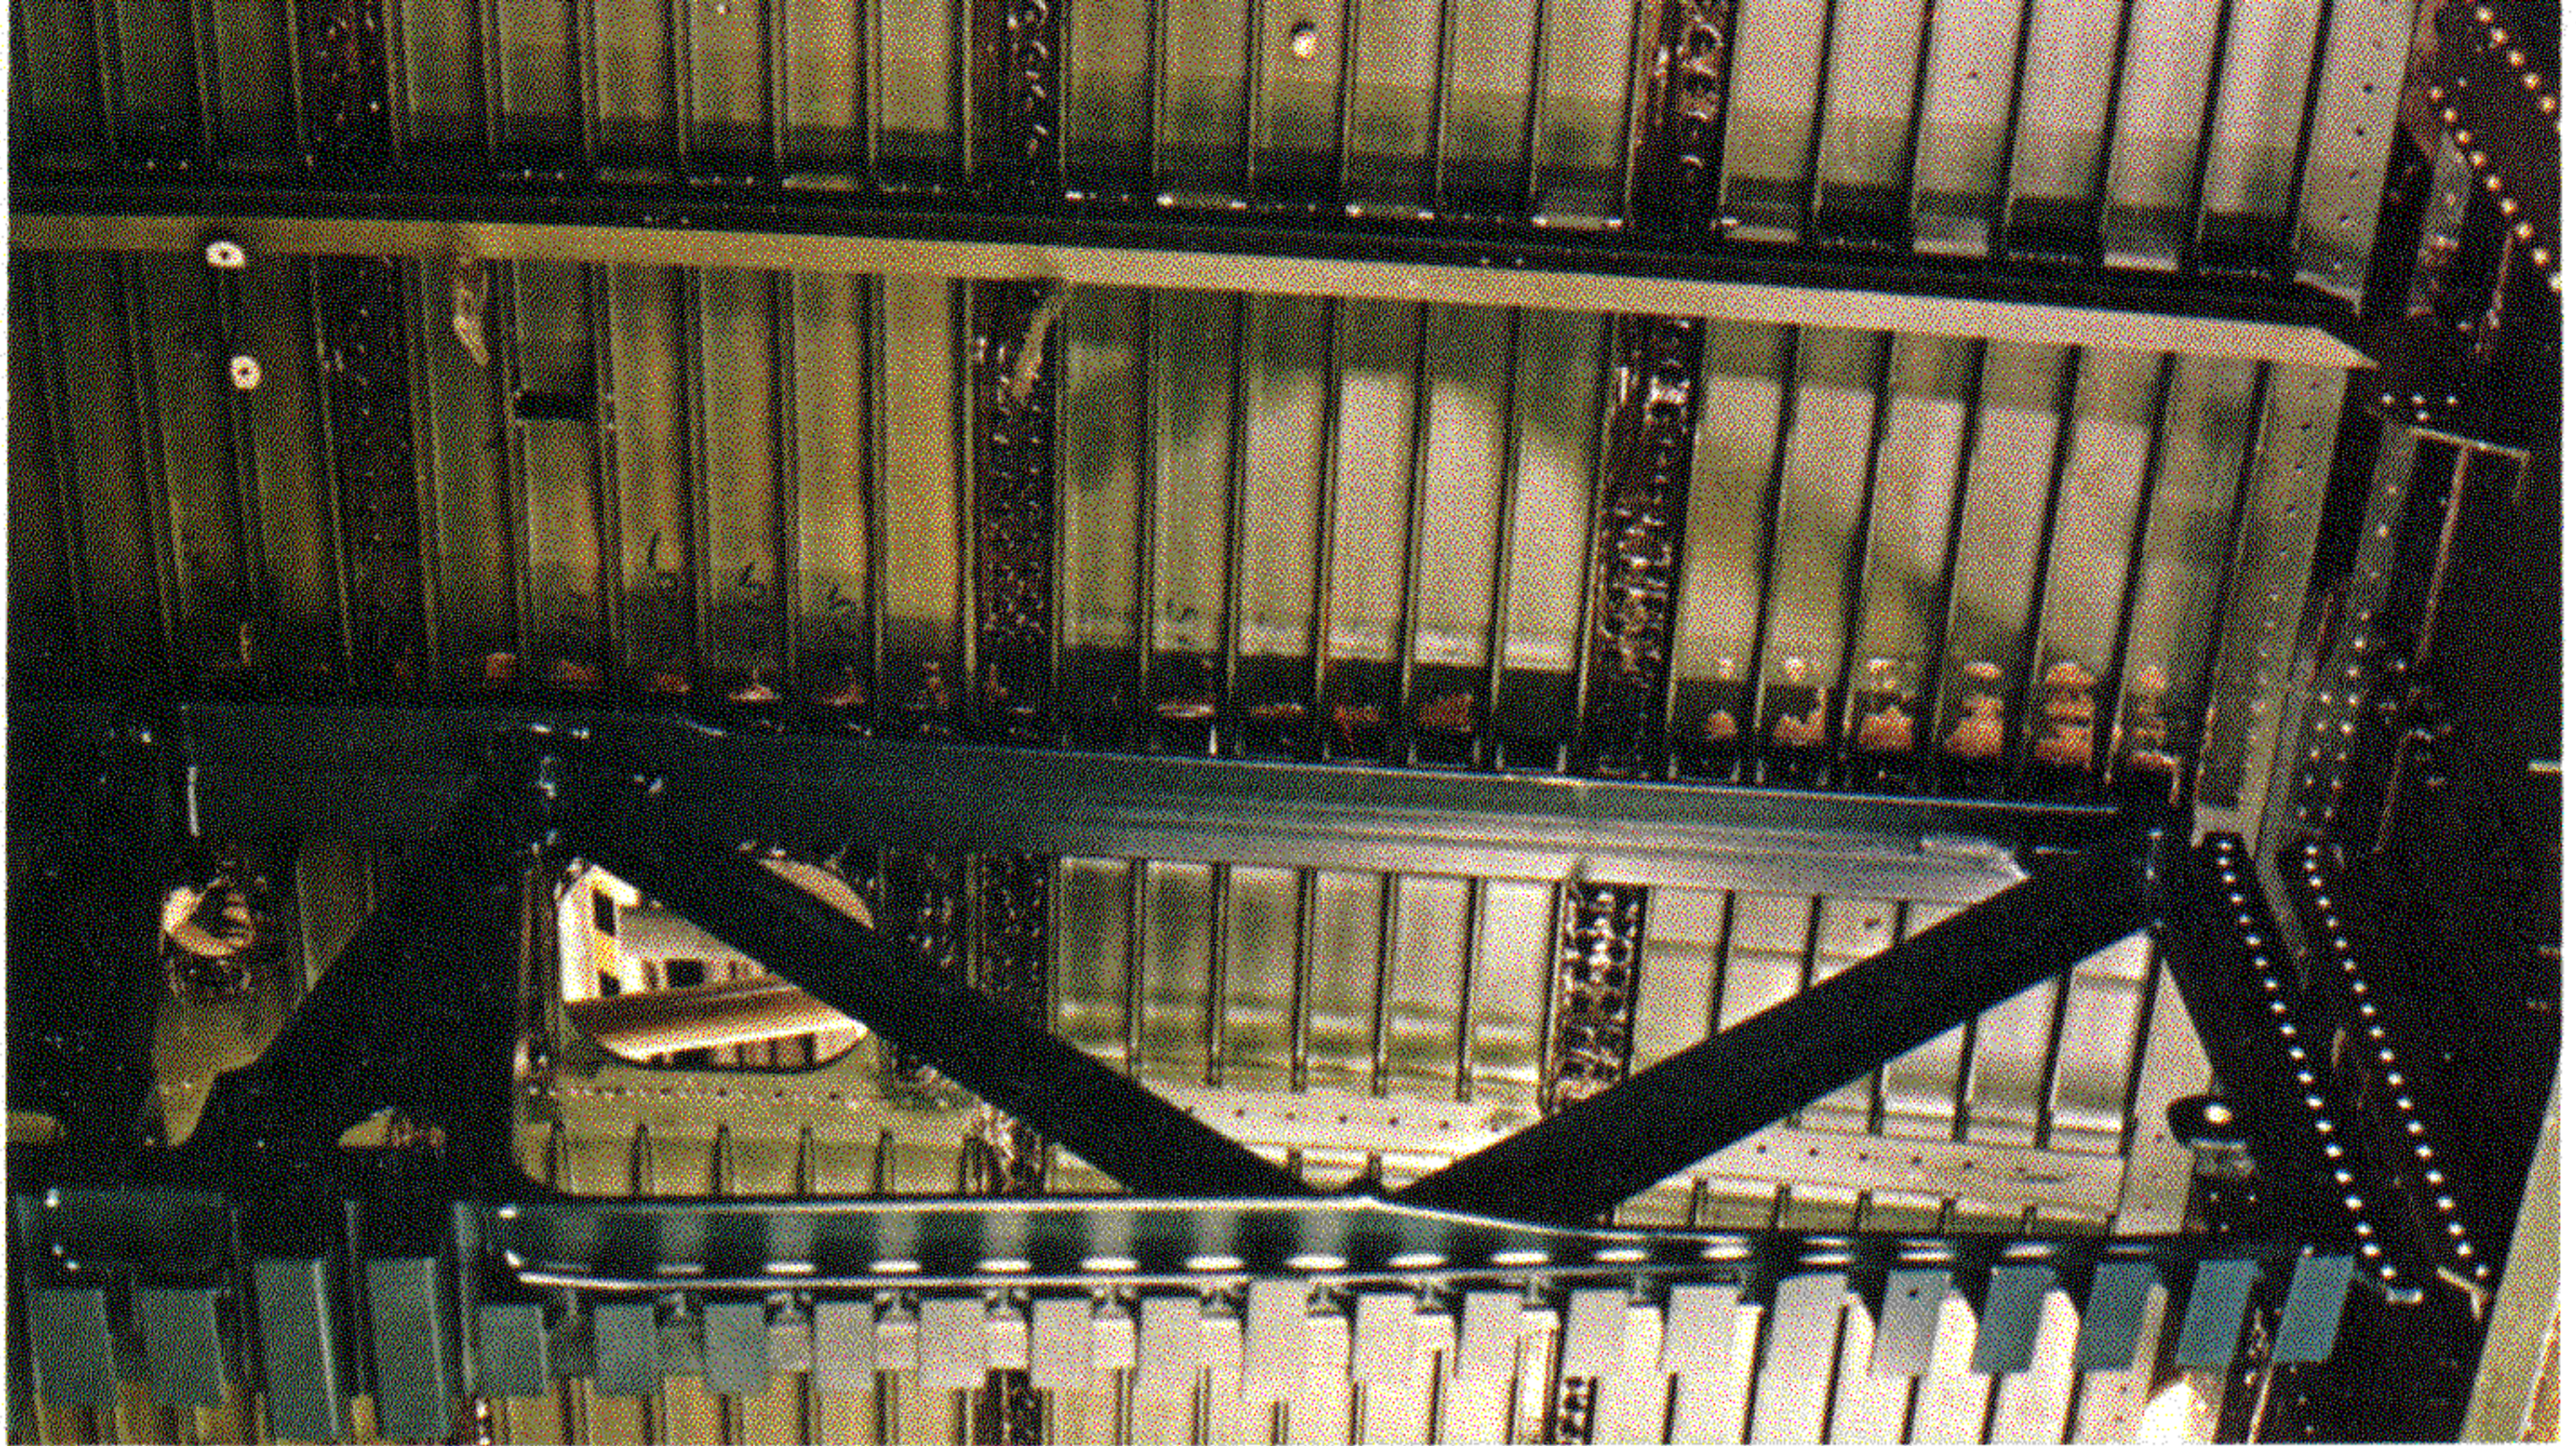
Main Landing Gear Outboard Rib and Wing Upper Surface Integrally Stiffened Planks
